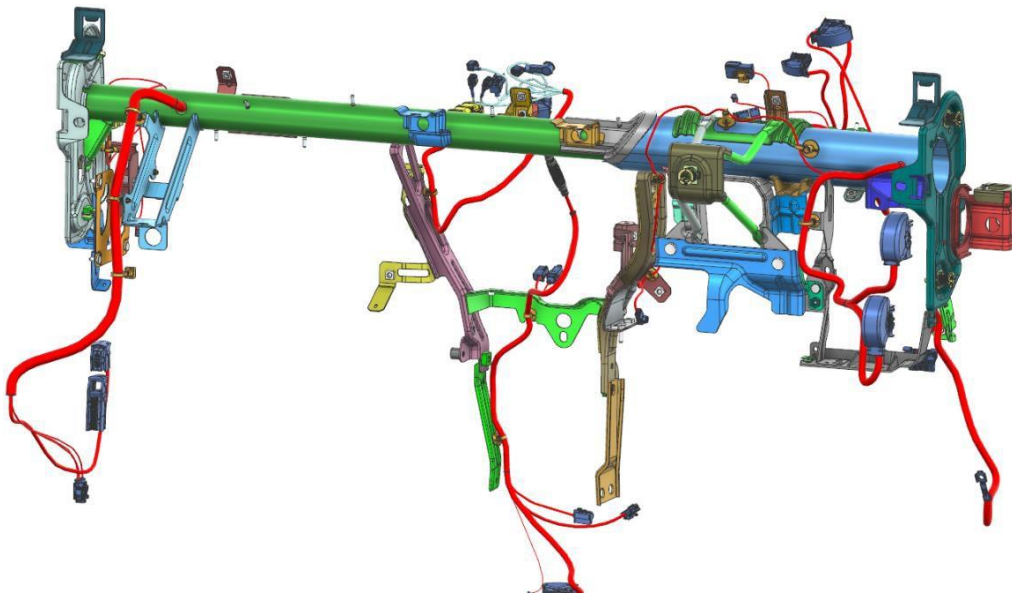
Cross-Car Beam old version isometric-view four small openings
